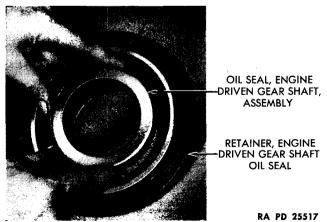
Installing Oil Seal In Engine Driven Gear Shaft Oil Seal Retainer
